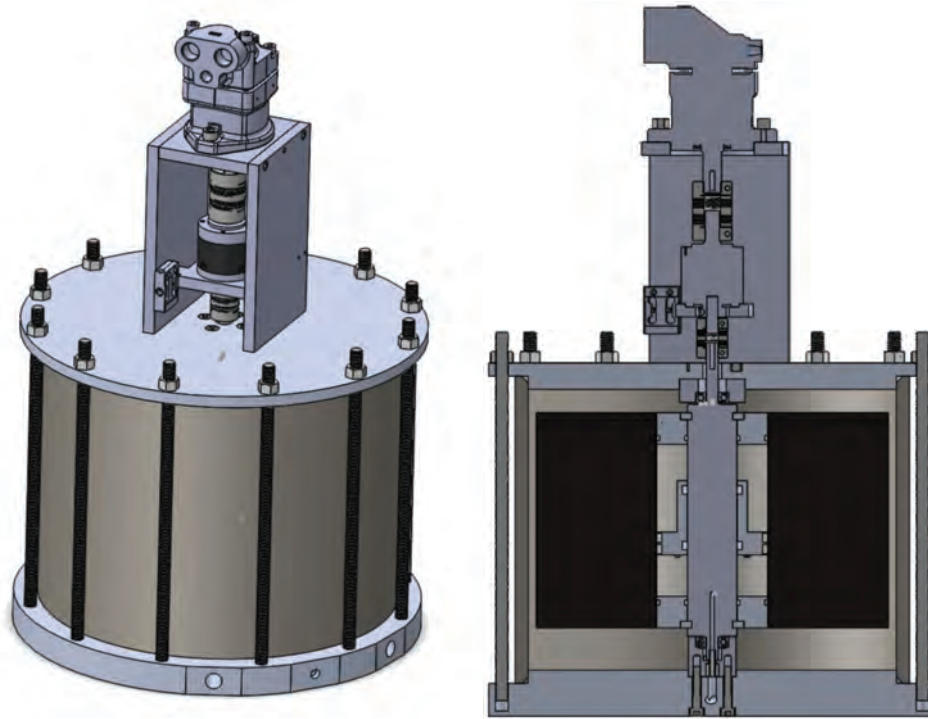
Cross-sectional view of the flywheel accumulator prototype system.
